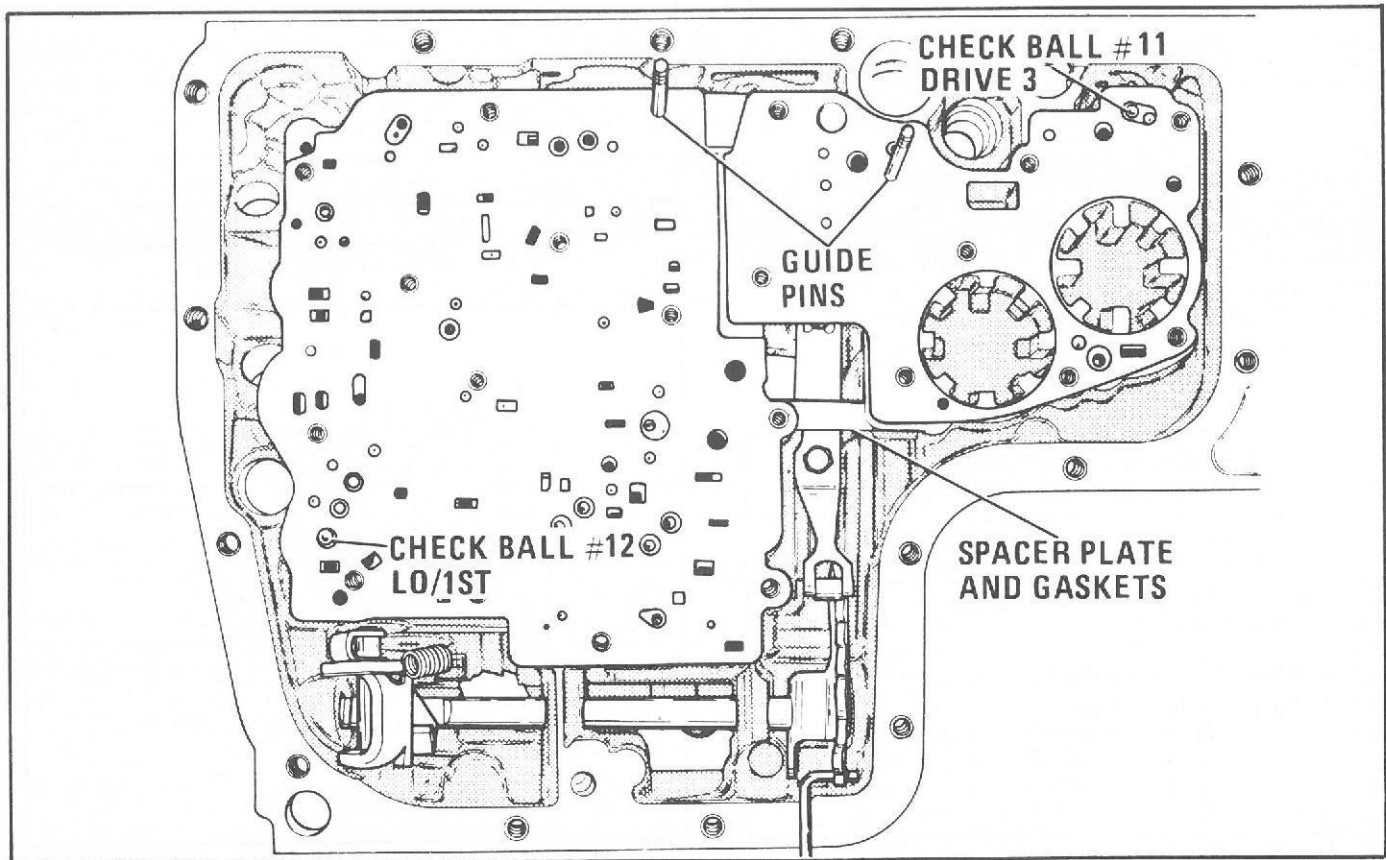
L-3—Location of Check Balls on Spacer Plate and Gasket
